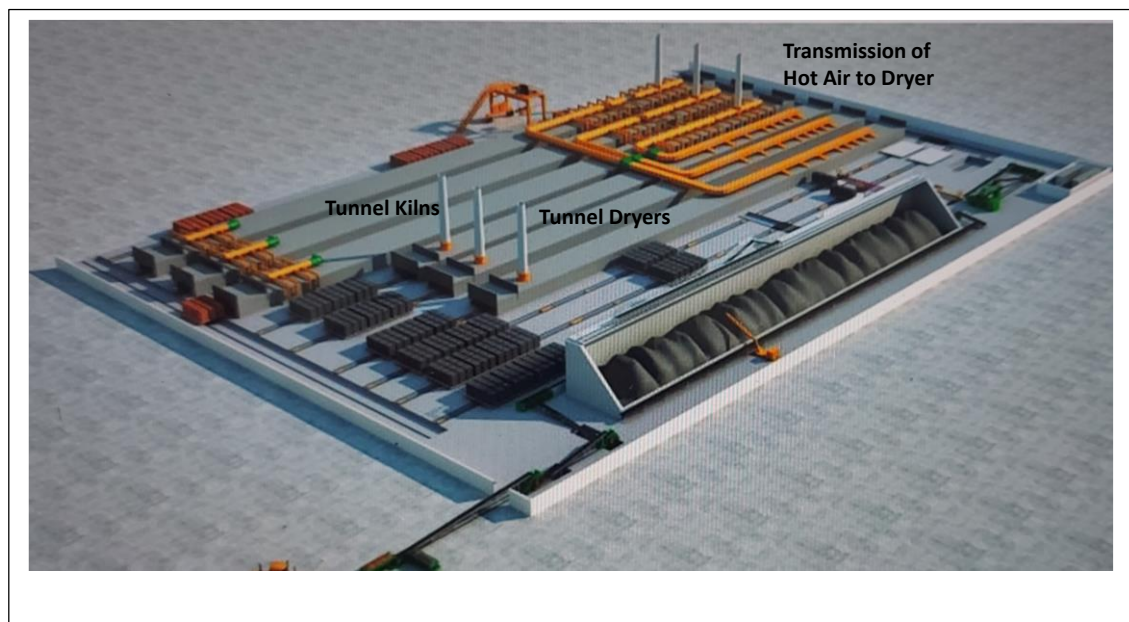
Typical Lay out of a Tunnel Kiln Plant (China)
